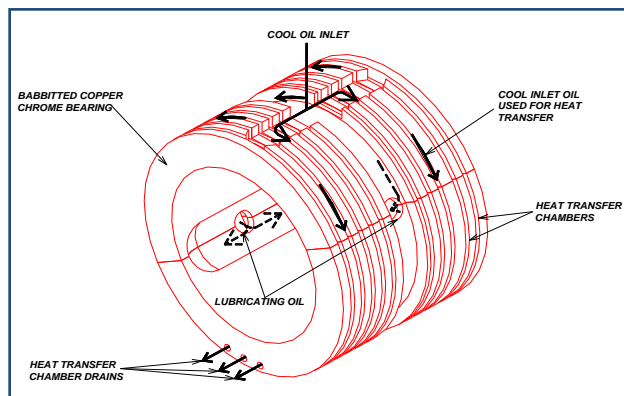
Bypass Cooling for Fixed-Geometry Bearings
